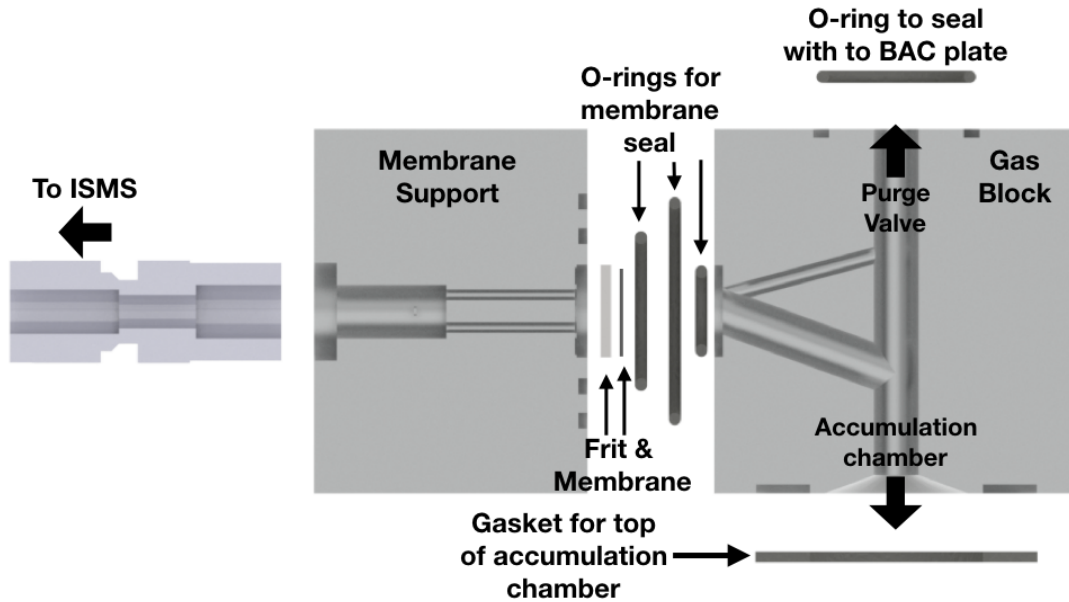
Exploded view of the membrane inlet. The Swagelok fitting on the left is connected to the ISMS. The largest membrane seal O-rings both seat in grooves in the left piece while the smaller O-ring seats in the cavity on the right piece. The frit seats in the cavity on the left piece and supports a thin membrane material.
